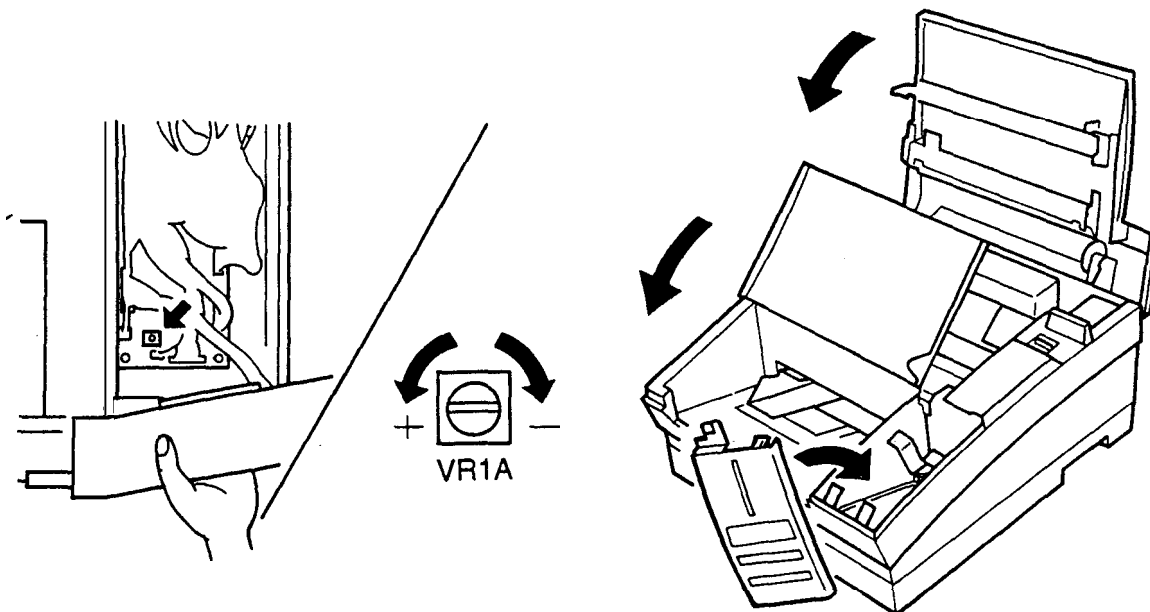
Holding the Control Panel and Adjusting VR1A Figure 4-4. Closing the Upper Cover and the Upper Unit
